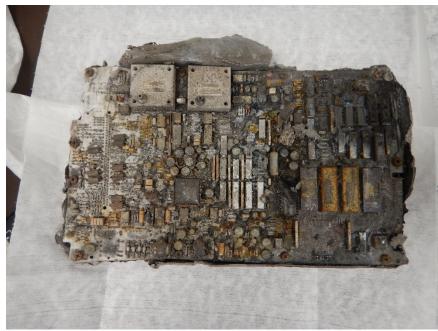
View of board "B" showing it was intact. (Honeywell)
